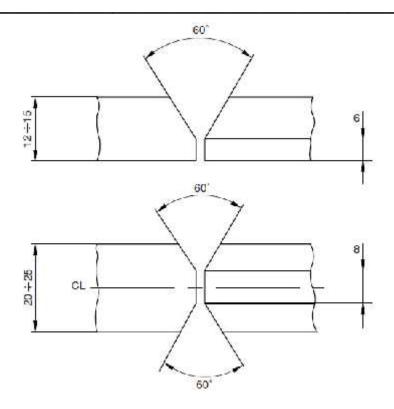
Recommended edge preparation for two-run butt weld test assemblies
